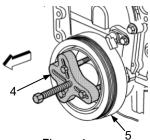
Install removal tool (4) on Harmonic Damper (2)
